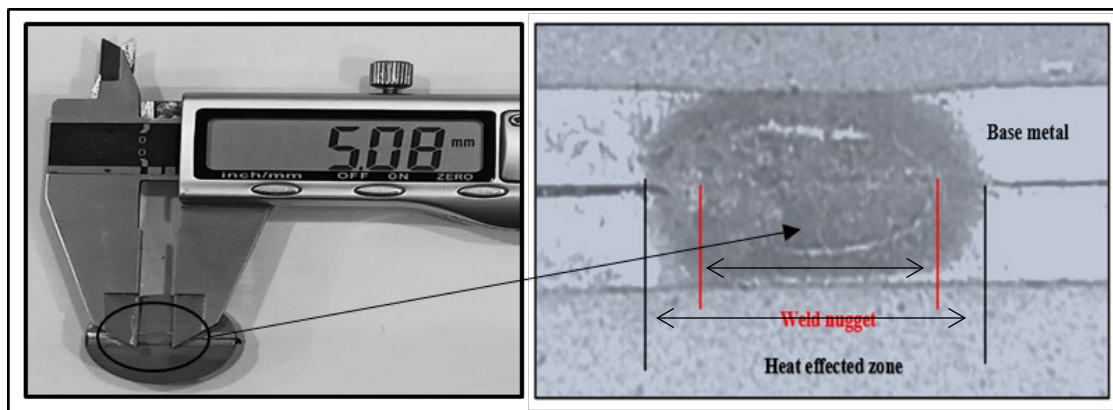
Macrograph test for spot weld nugget identification and size measurement
